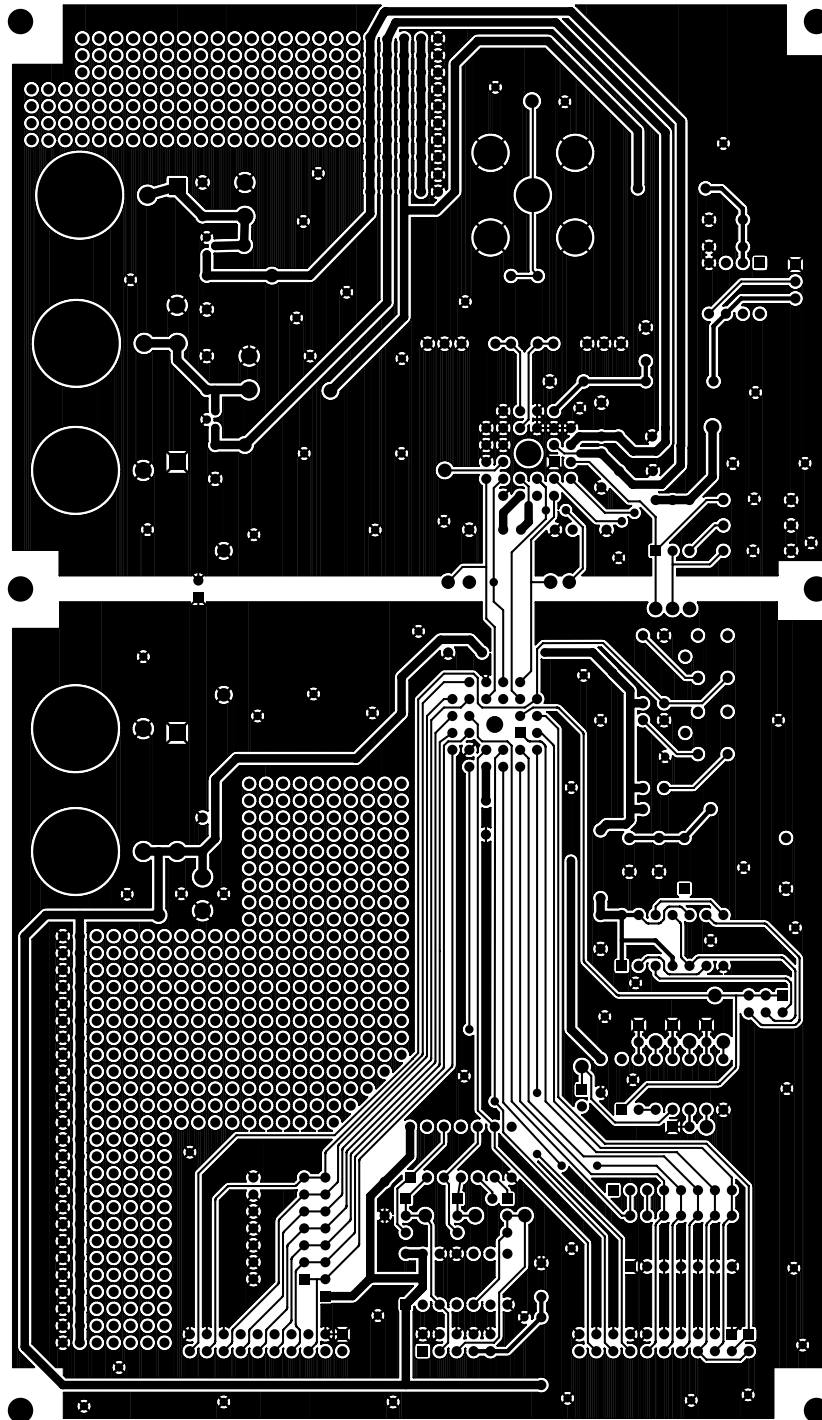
CDB5321 (Rev. C) Solder Side Layer (Not to Scale)
